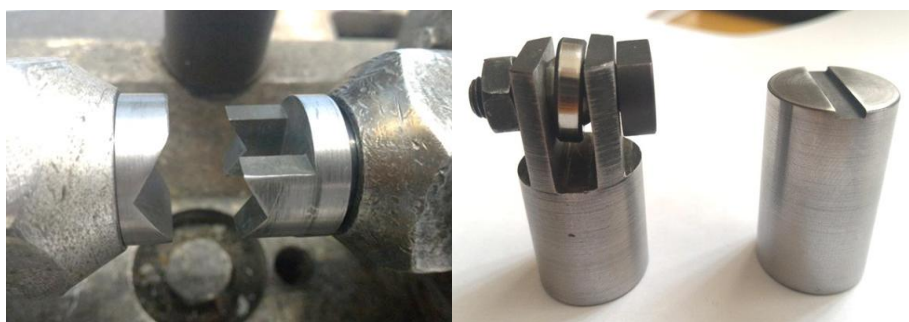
A photo of clamps for testing spherical sliding bearings up to 10 mm under vibration conditions on a modernized installation of the fretting-corrosion machine.
